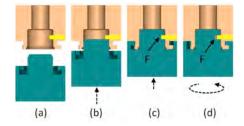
Assembly of Universal Coupler, Concept 1: (a) Unassembled, (b) Partial assembly, (c) Full assembly, (d) Full assembly after lock. Distal component is shown in dark teal, proximal component in light tan.
